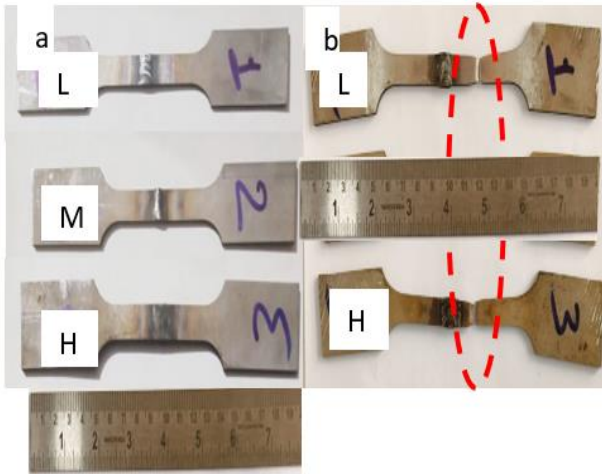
Tensile specimen of LWC, MWC and HWC welds a) before fracture and b) after fracture
